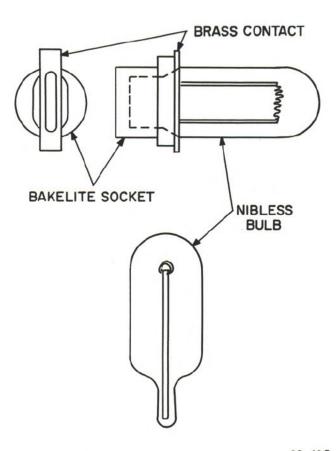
Press-fit bulb and socket for dash-printed circuit.
